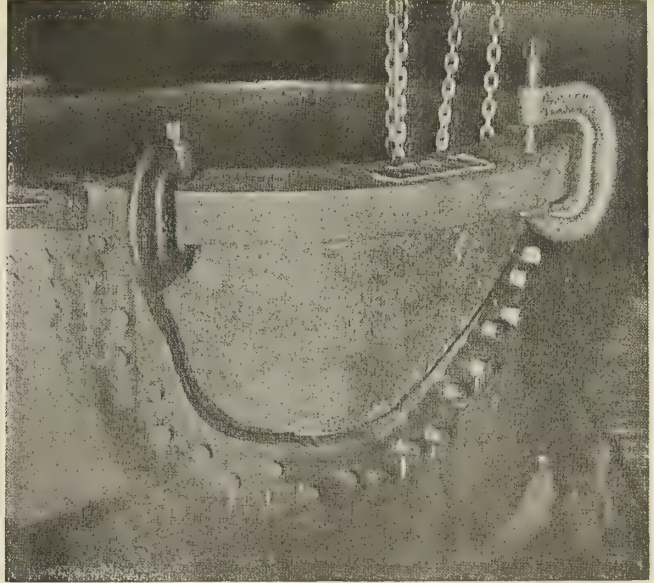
Same as Fig. 1, Insert in Place Ready to Weld
